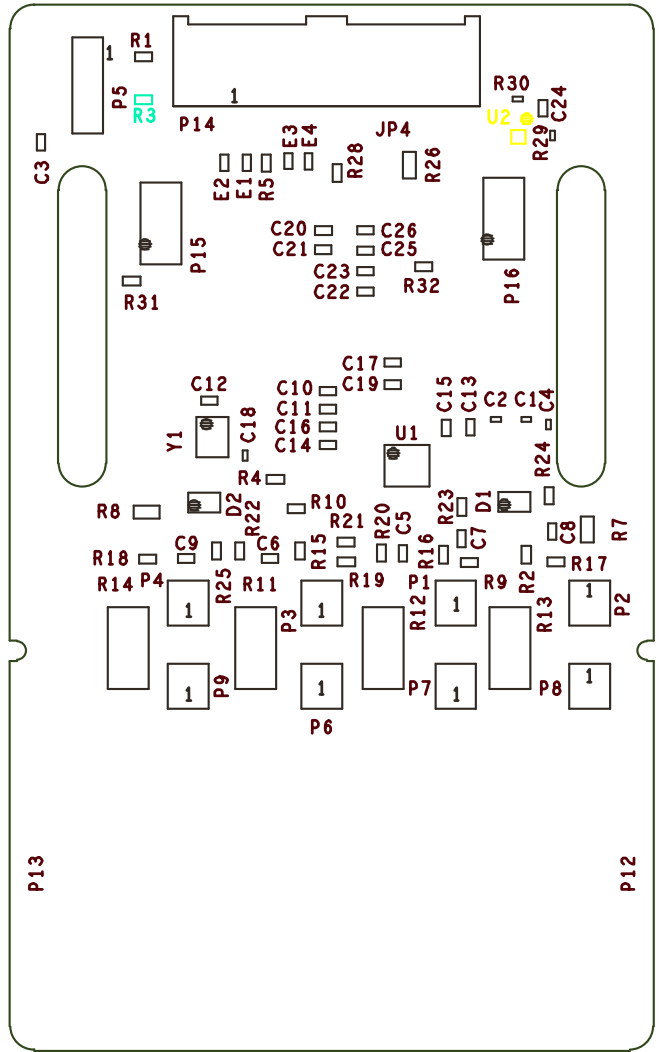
EVAL-ADPD7000Z PCB Layout: Assembly Top
